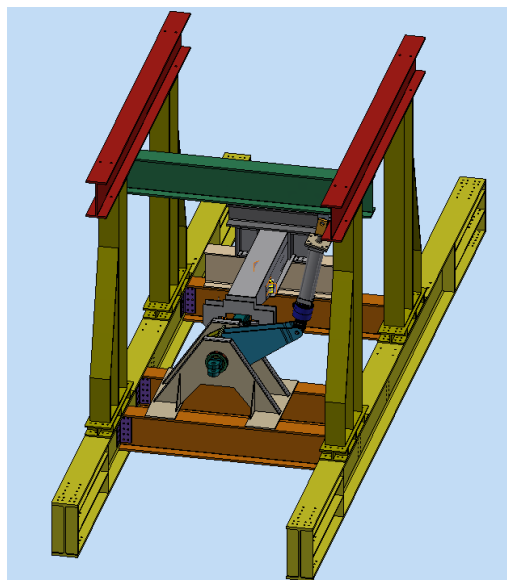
Test Fixture – CAD 3D View (diagonal beams not shown for clarity)
